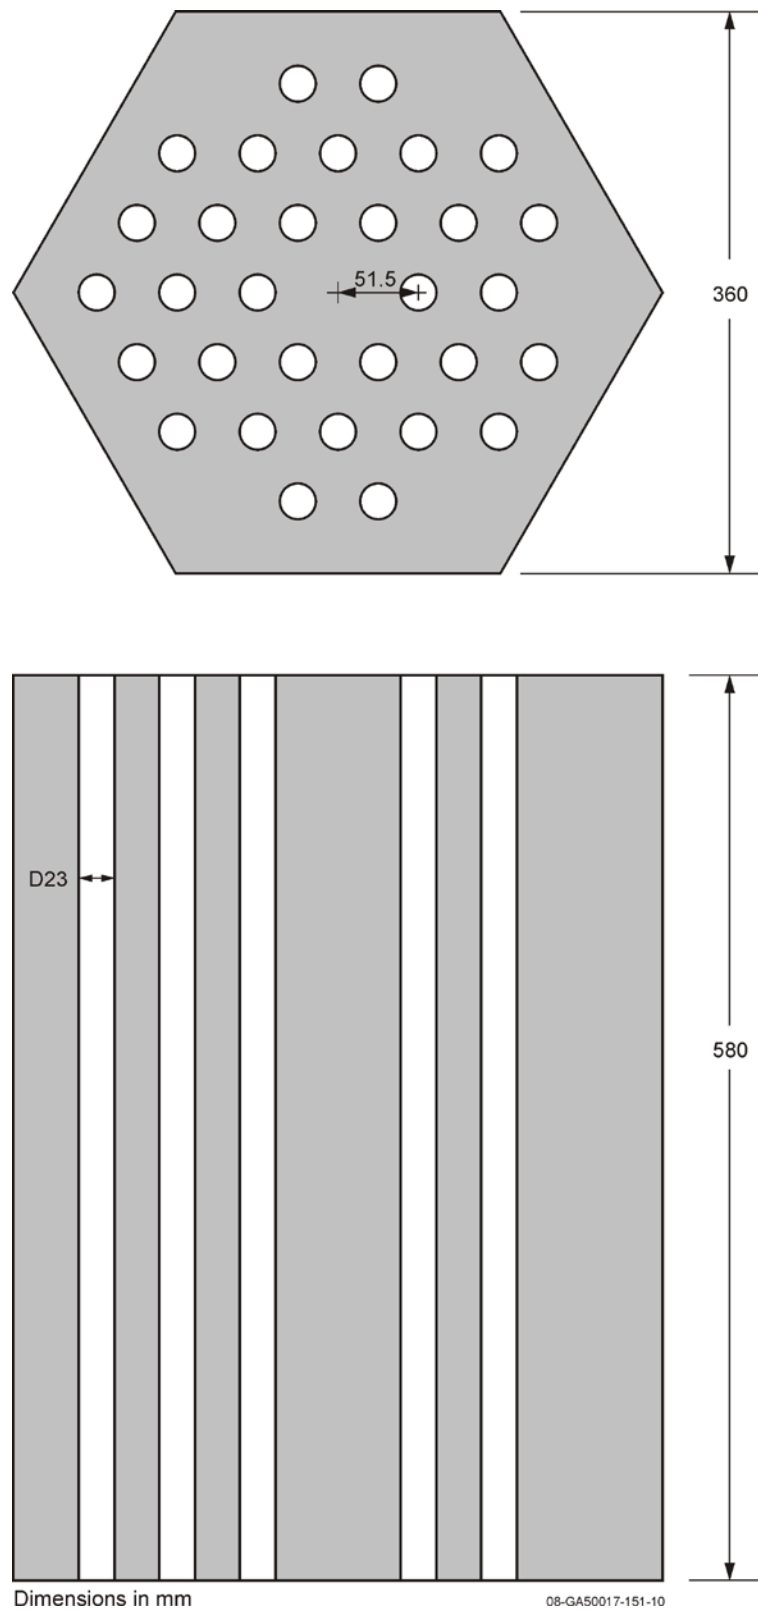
Replaceable reflector block for 31-pin fuel assembly. Dxx represents the diameter in xx (mm).
